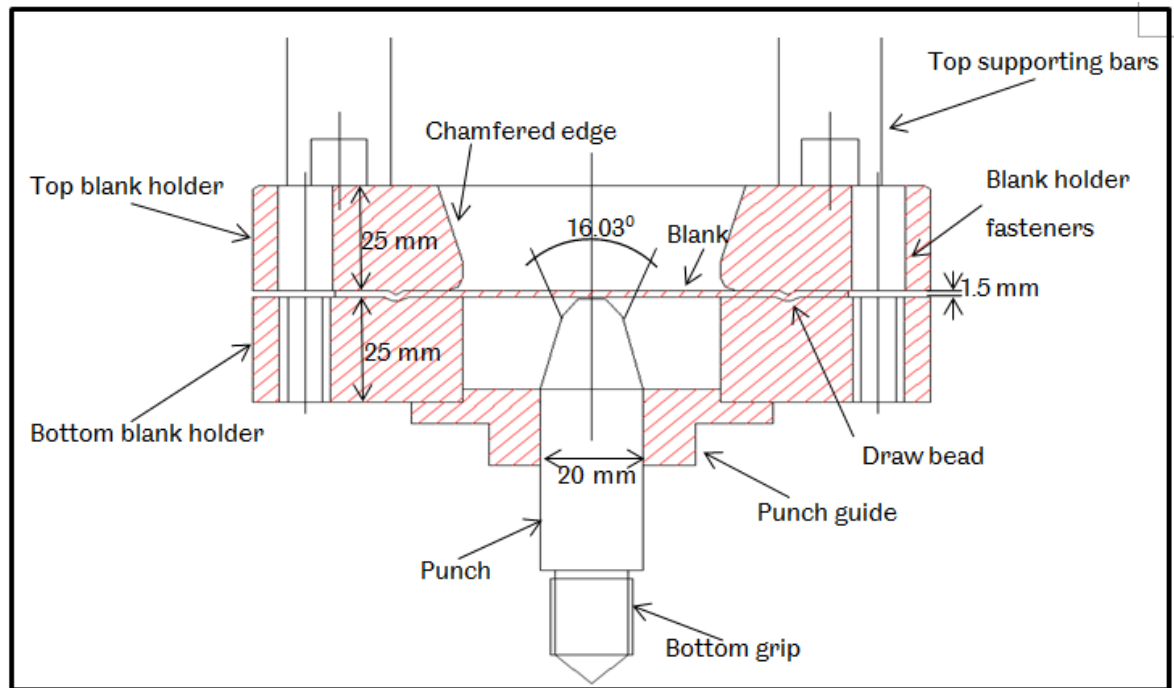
Laboratory scale punch test set up using a 90mm diameter blanks.
